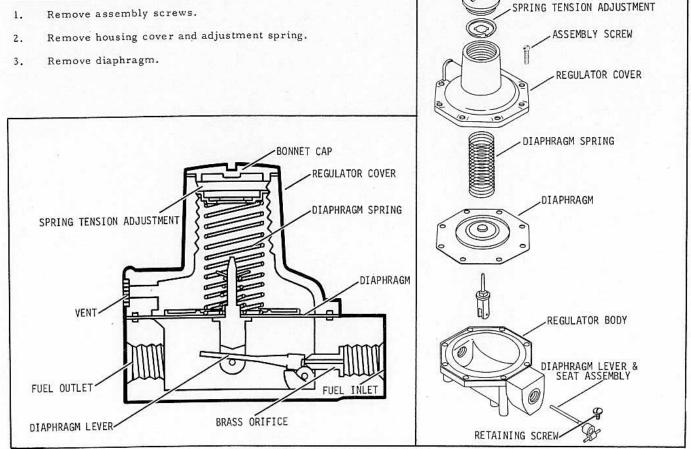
PRIMARY REGULATOR Remove diaphragm lever, retaining screws and lever assembly.
